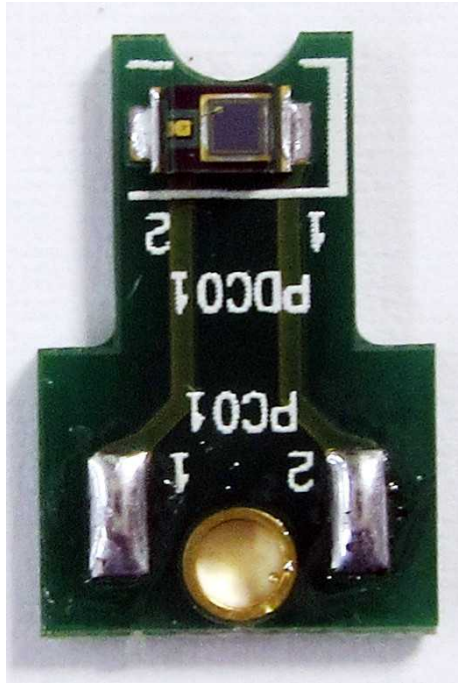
DS-SENSOR-B01C0-00_PCB_Photo_PartsSIDE
